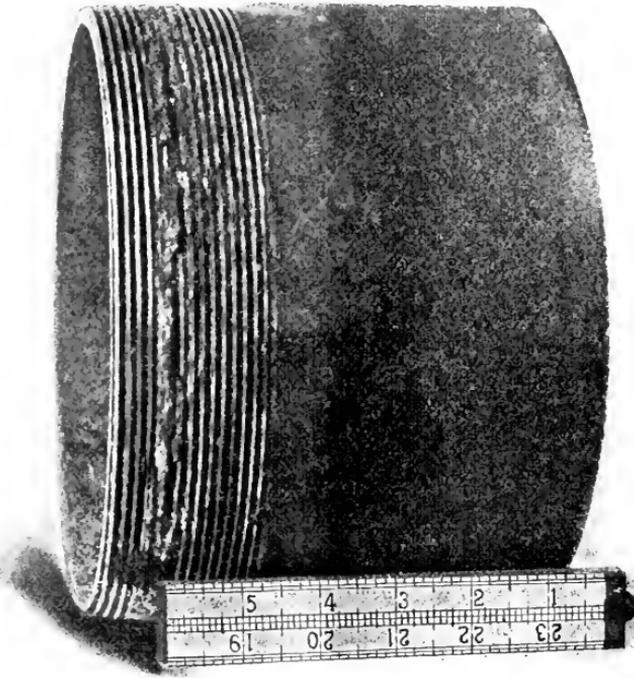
EIGHT-INCH PIPE, WHICH COULD BE MADE UP ONLY THREE THREADS.
